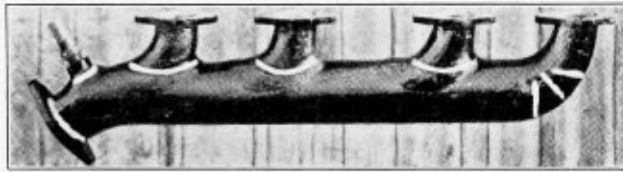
Acetylene Welded Non-Jacketed Exhaust Pipe
